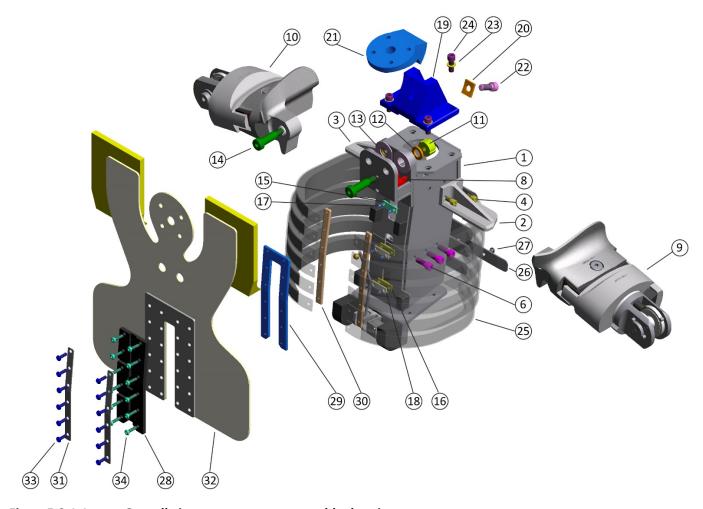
Overall view - upper torso assembly drawing
